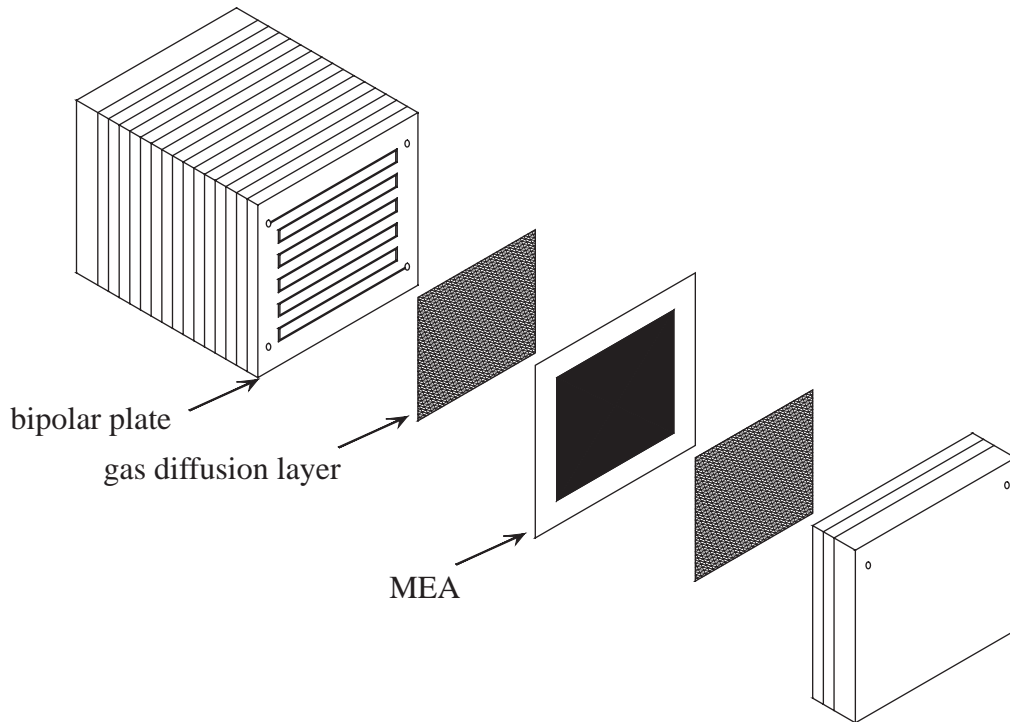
A PEMFC stack, with exploded view to one unit cell.
